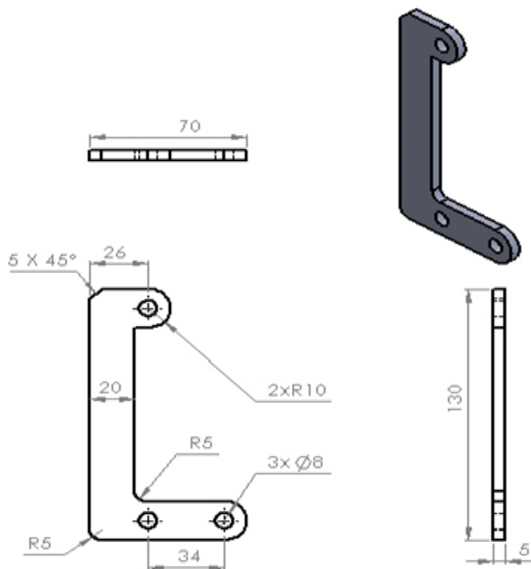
Drawing Detailing view of Hand Operating Gripper Coupling Plat.
